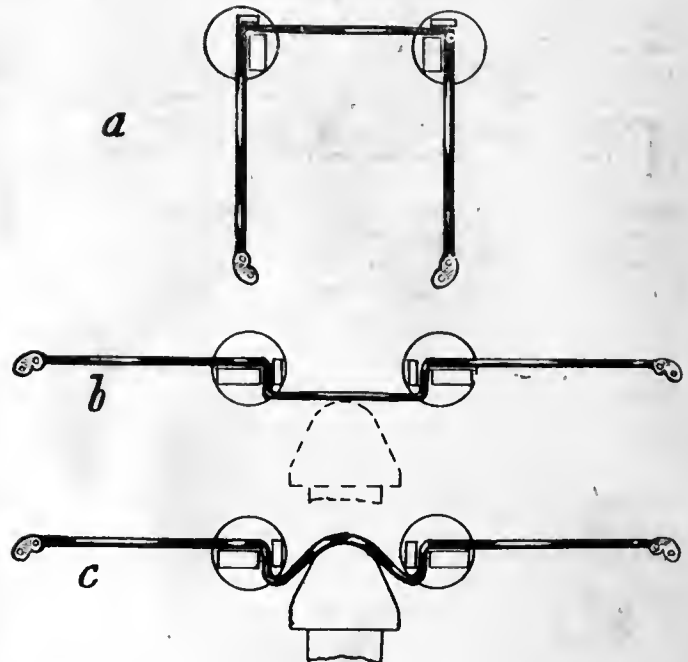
ILLUSTRATING ACTION OF BRIDGE BENDING MACHINE.
